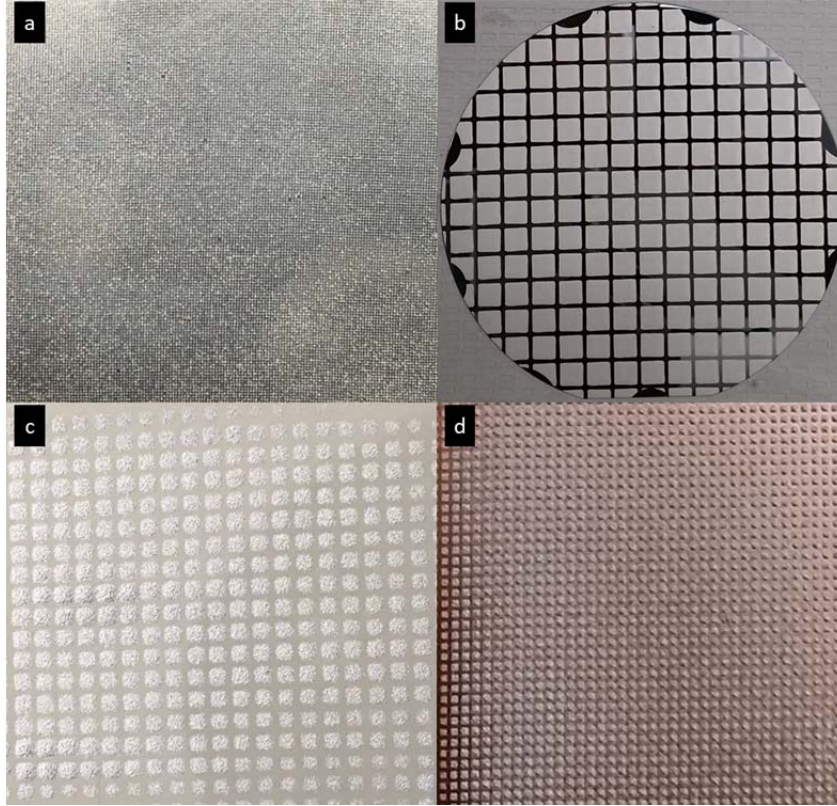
Two-dimensional features fabricated on (a) aluminum, (b) silicon wafer, (c) glass, and (d) copper foil layer of PCB with cold spray surface patterning technique.
